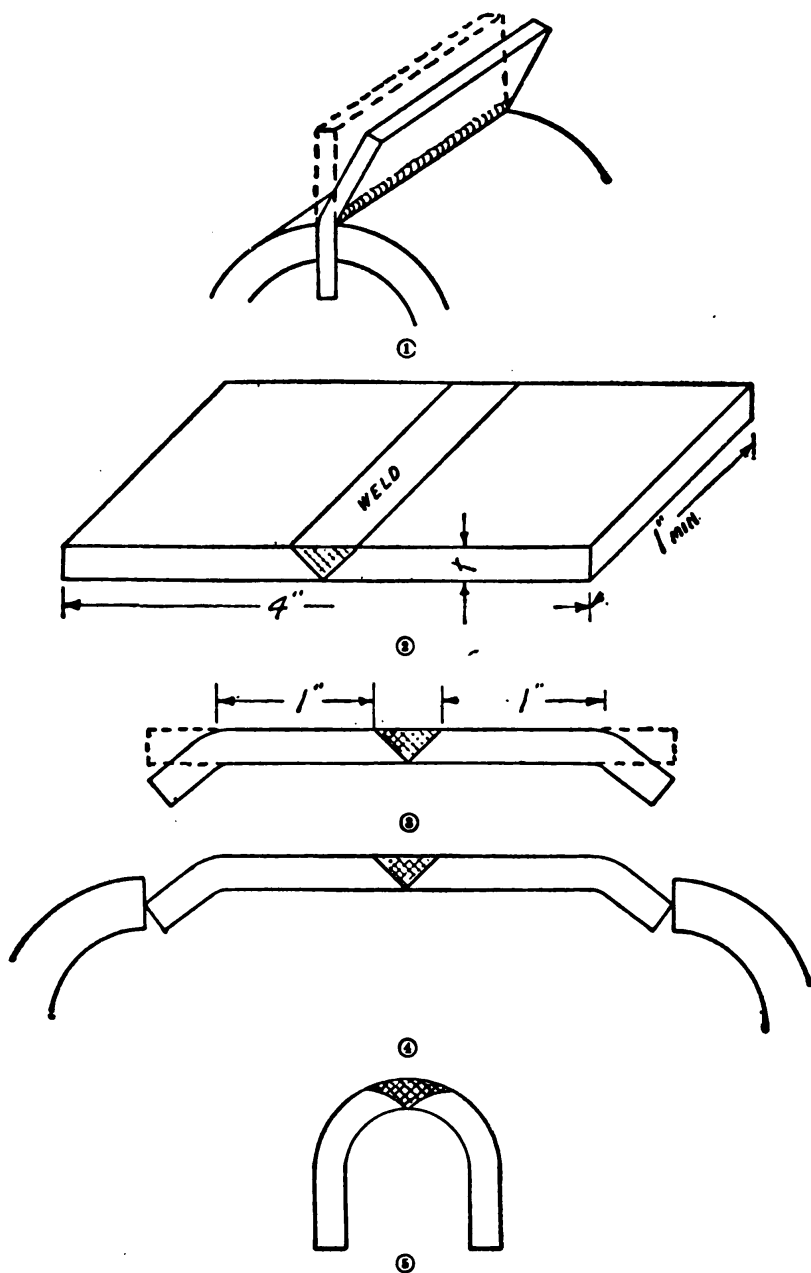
Method of testing butt joints for weld defects.
